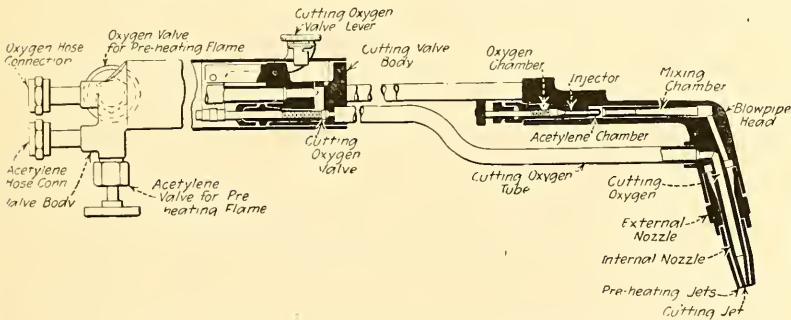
Details of the Oxweld Cutting Torch, Model B.
